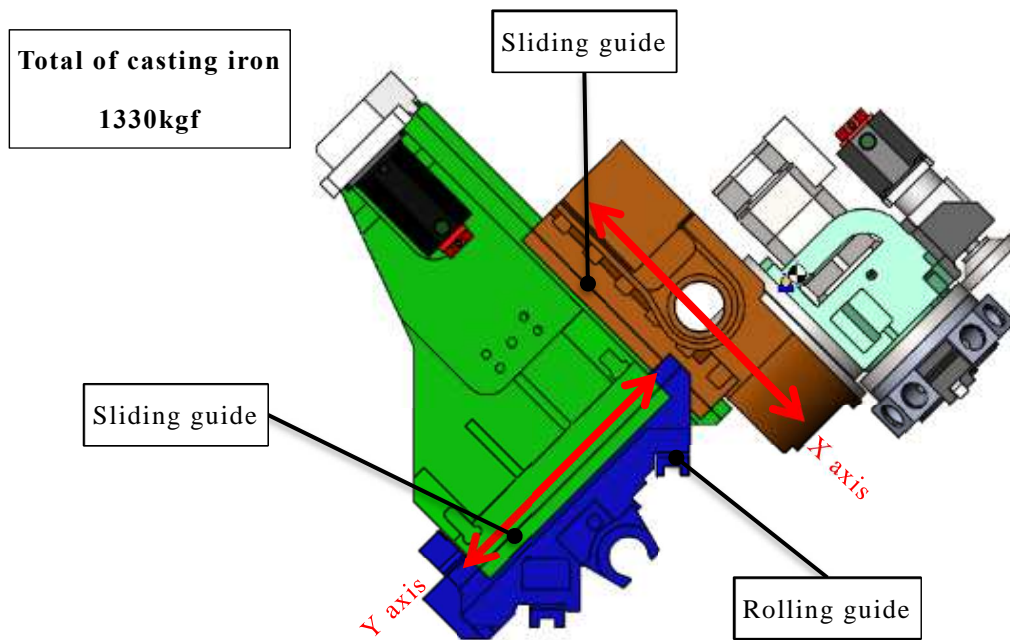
Machine structure with swivel B axis, slide guide for X axis and rolling guide for Y and Z axis (Structure No. 3)
